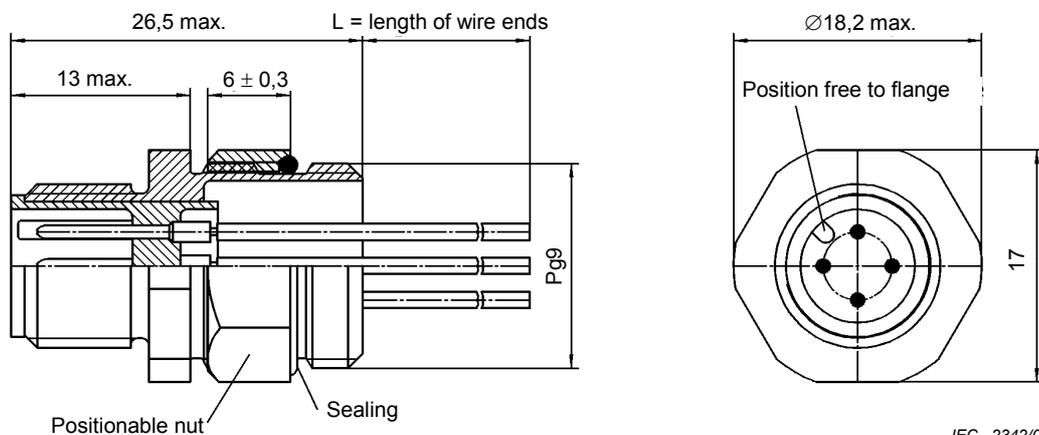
Fixed connector with wire ends, single hole mounting Pg9, keyway orientation, male contacts
